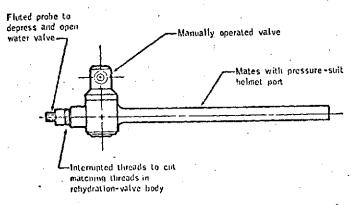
Pressure suit penetration tube with valve adapter inserted into food package rehydration valve.
